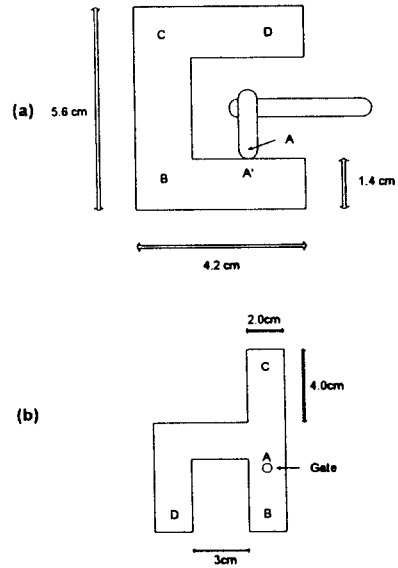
Geometry of molds used for numerical analysis. (a); mold A, (b); mold B
